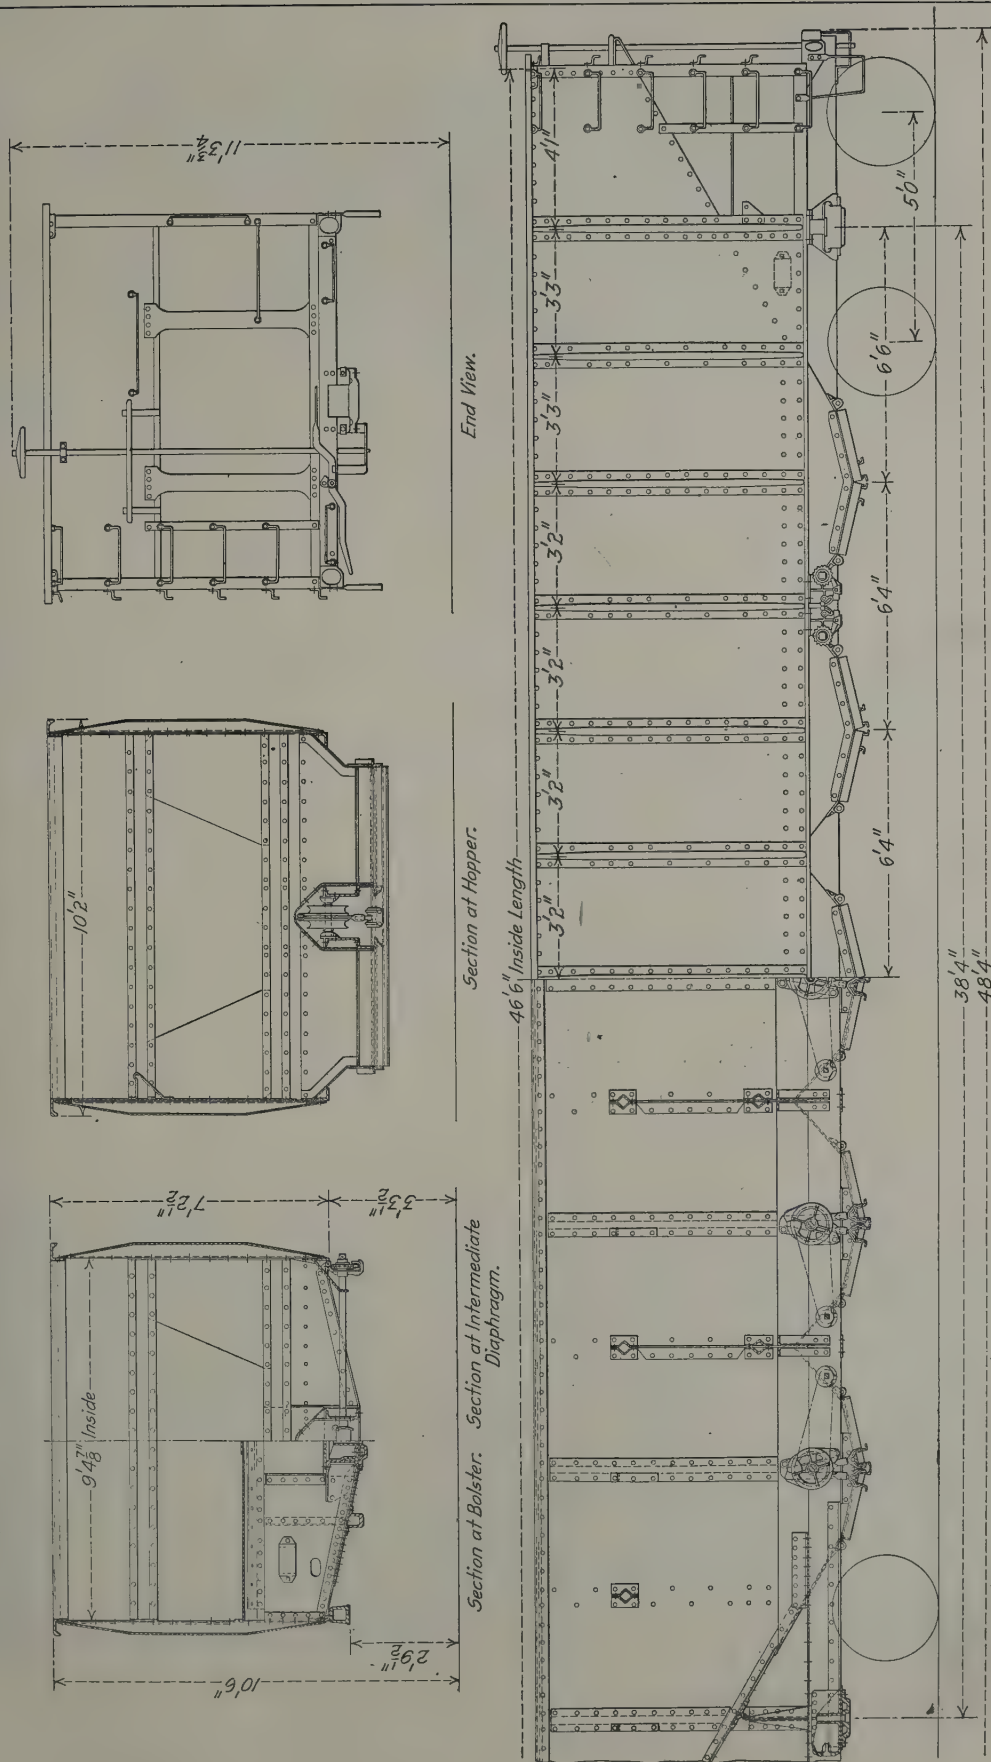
Elevation, Cross Sections and End View 85-Ton Hopper Car Shown in Figs. 55-57.
